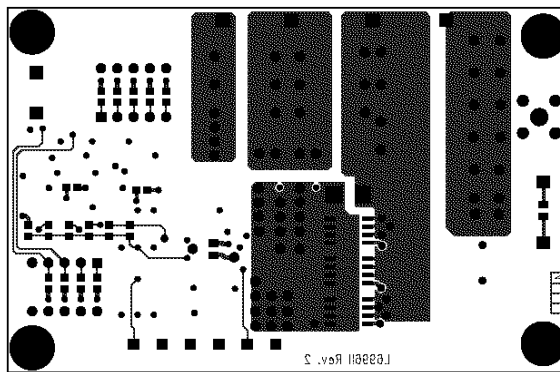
PCB Board Layout - Layer two (Internal Ground plane)
